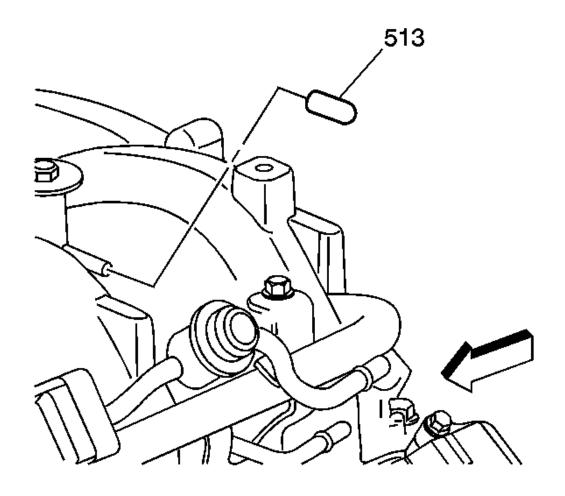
View Of Vacuum Plug Courtesy of GENERAL MOTORS CORP.
